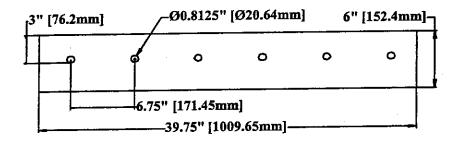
Long Piece for Cube Formwork Showing Dimensions and Hole Locations
